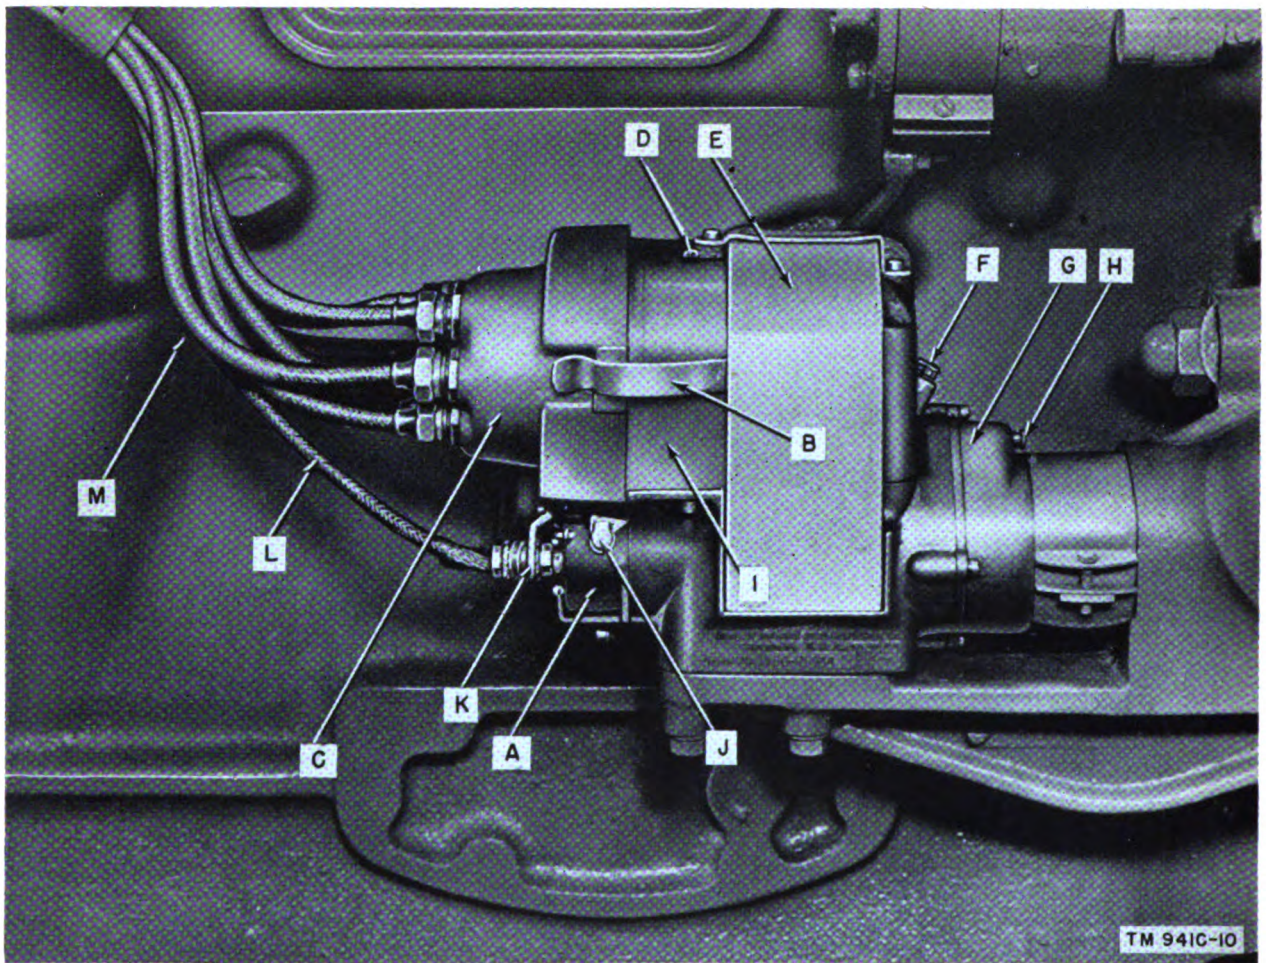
Power Unit PE-215-E—engine close-up, left side.
